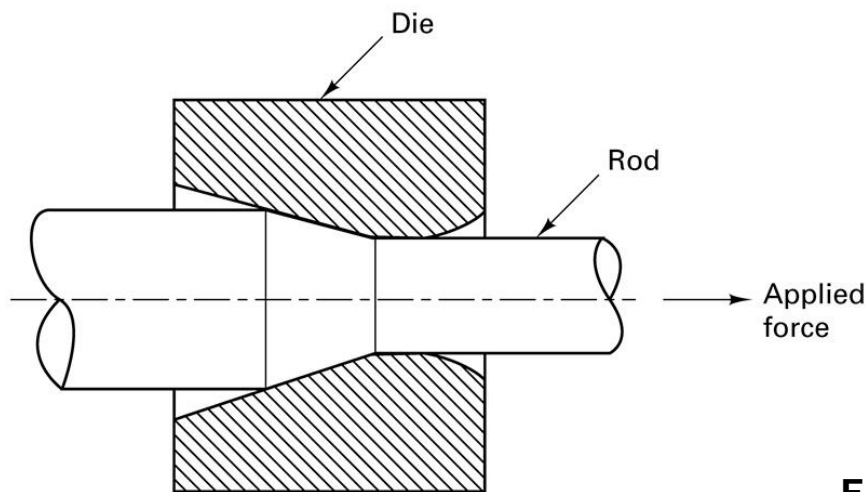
Schematic drawing of the rod-or bar-drawing process.
